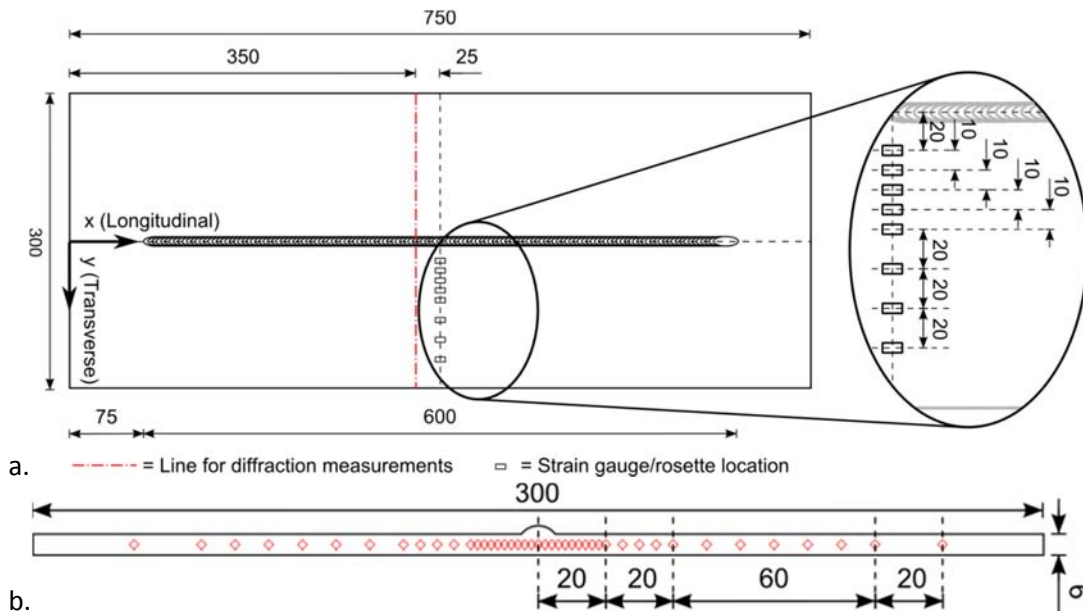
Measurement locations on the welded specimens. (a.) Plan view, with expanded view of strain gauge positions. (b.) Cross-section view showing gauge volumes used for neutron diffraction measurements. All dimensions in mm.
